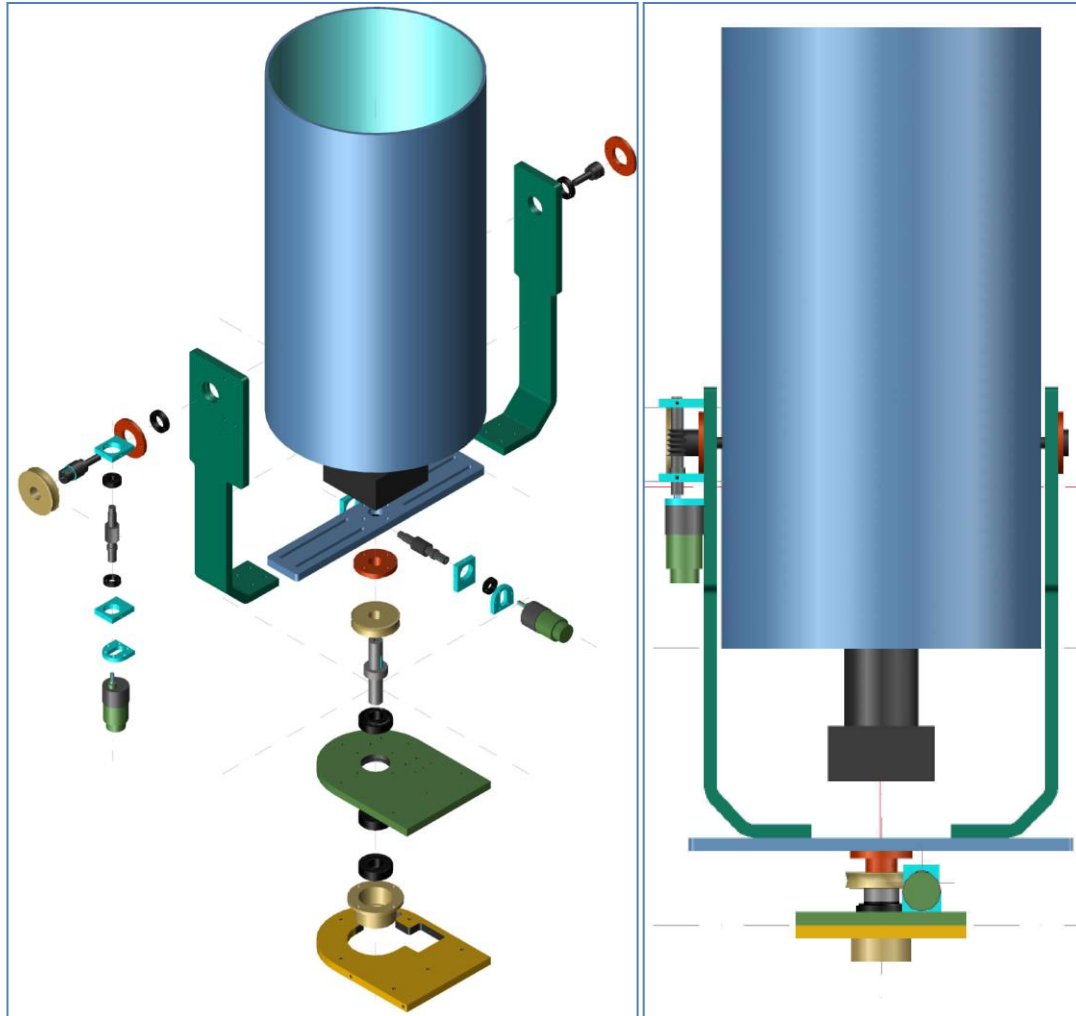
a: Telescope mount design's exploded view, b: Telescope mount design's assembled view.
